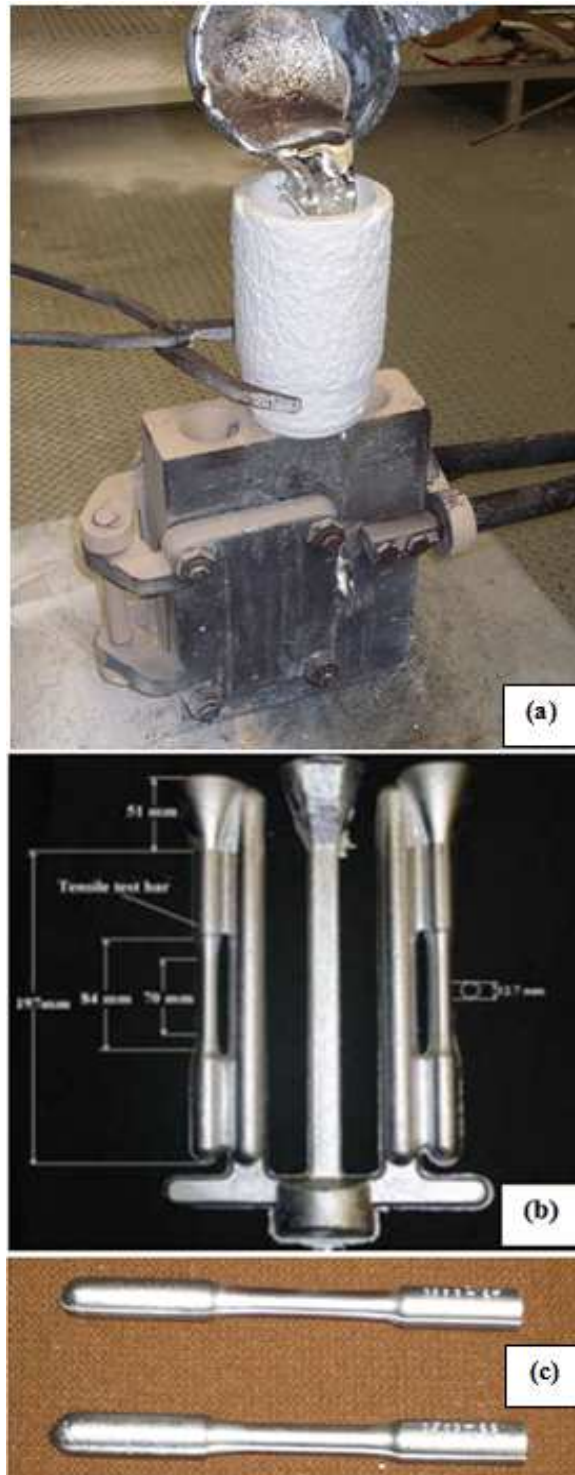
(a) Standard ASTM B-108 permanent mold and casting set-up used, (b) actual tensile test casting, and (c) actual test bars sectioned from the casting.
